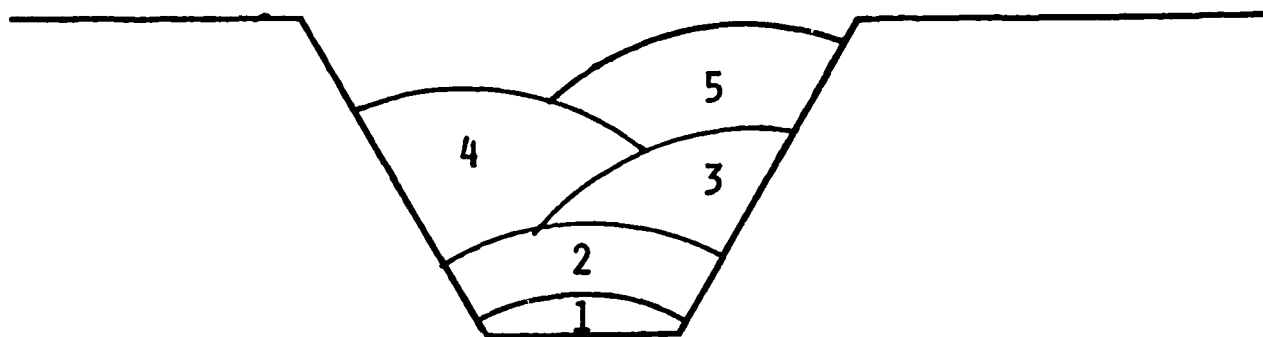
LABORATORY WELD JOINT DESIGN
